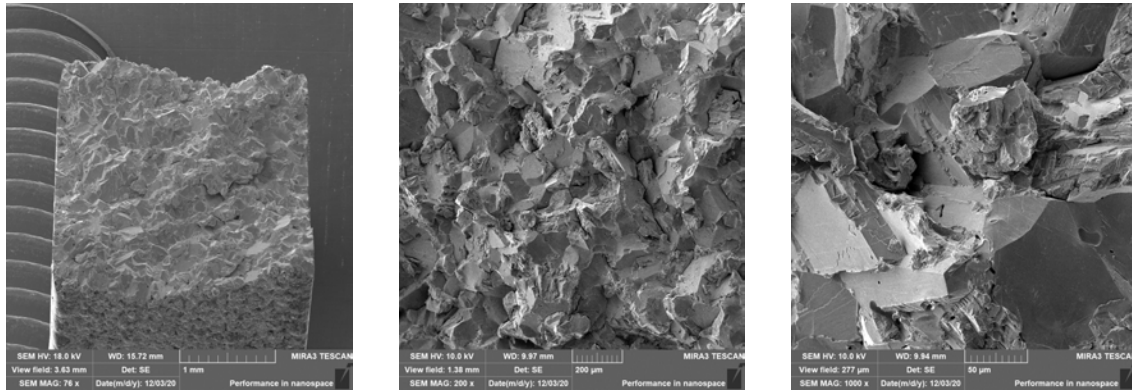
Fracture Surface of Print with 1000 mm/s Laser Speed
